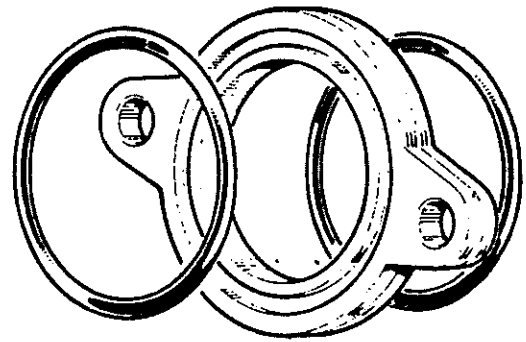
CARBURETTER FLEXIBLE MOUNTING (WEBER)
